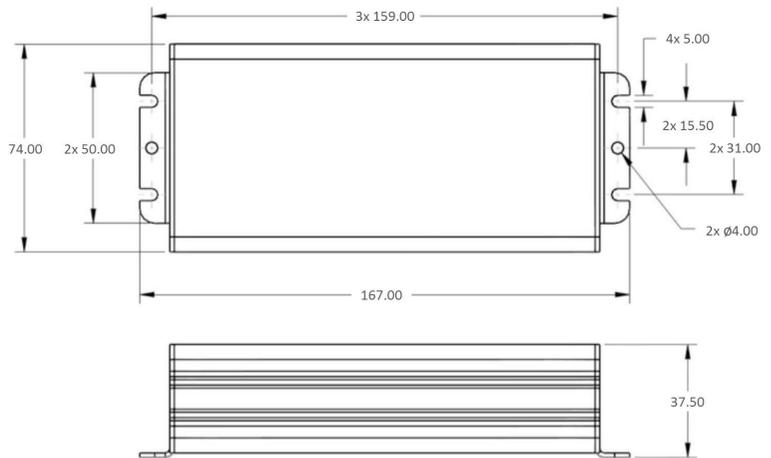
CPD 3000 Housing Profile (dimensions in millimeters)
